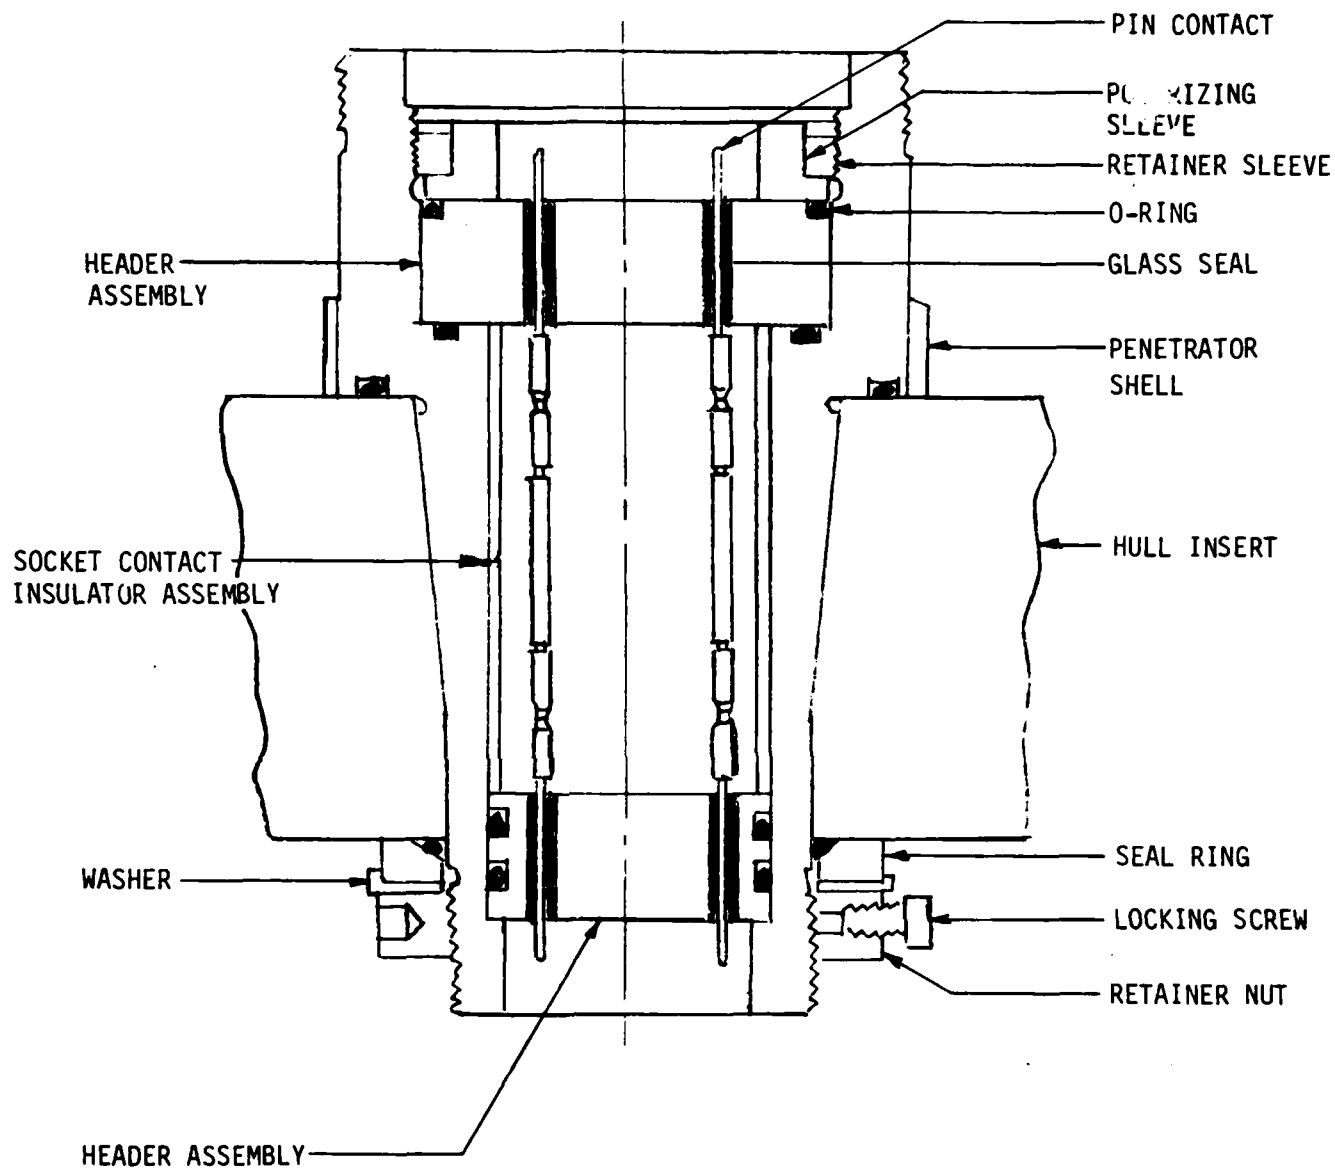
DOT PROGRAM 20,000 FOOT HULL PENETRATOR
